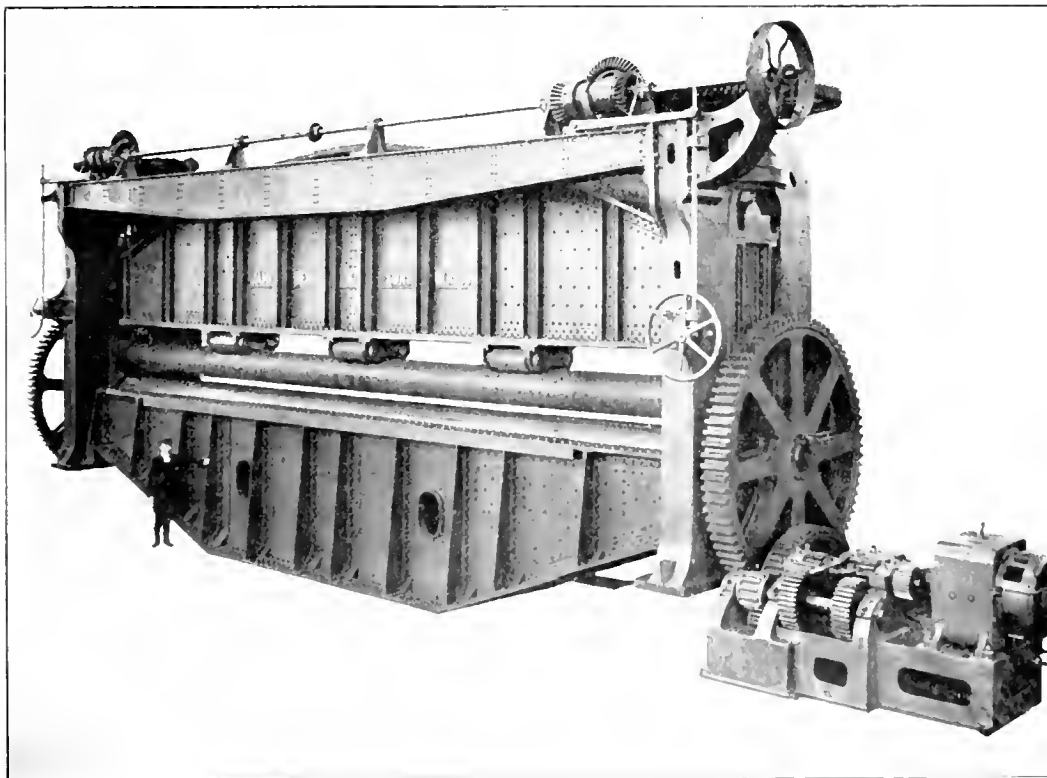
Heavy Plate Bending Machine, by Messrs. James Bennie & Sons, Glasgow
